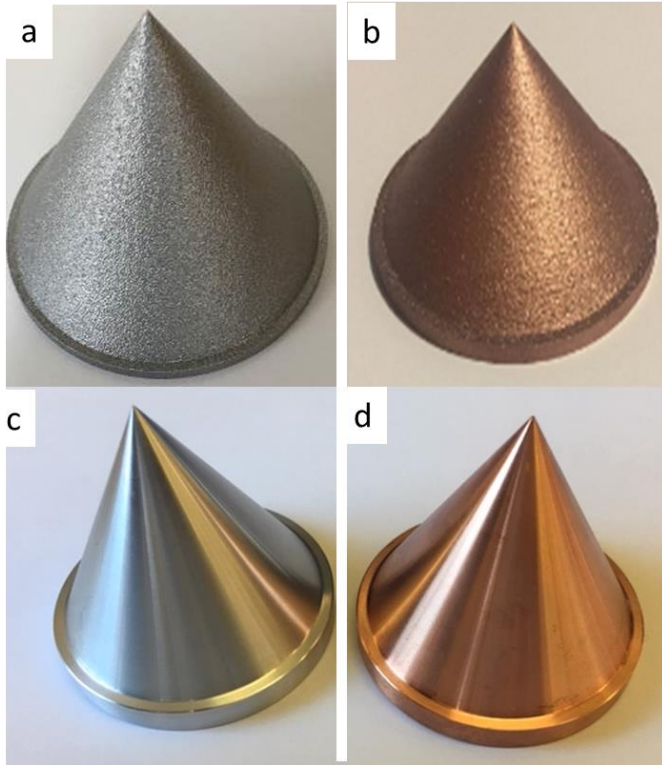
Produced Laser sintered aluminium and copper liners (a and b); machined aluminium and copper liners (c and d) in their as-manufactured forms.
